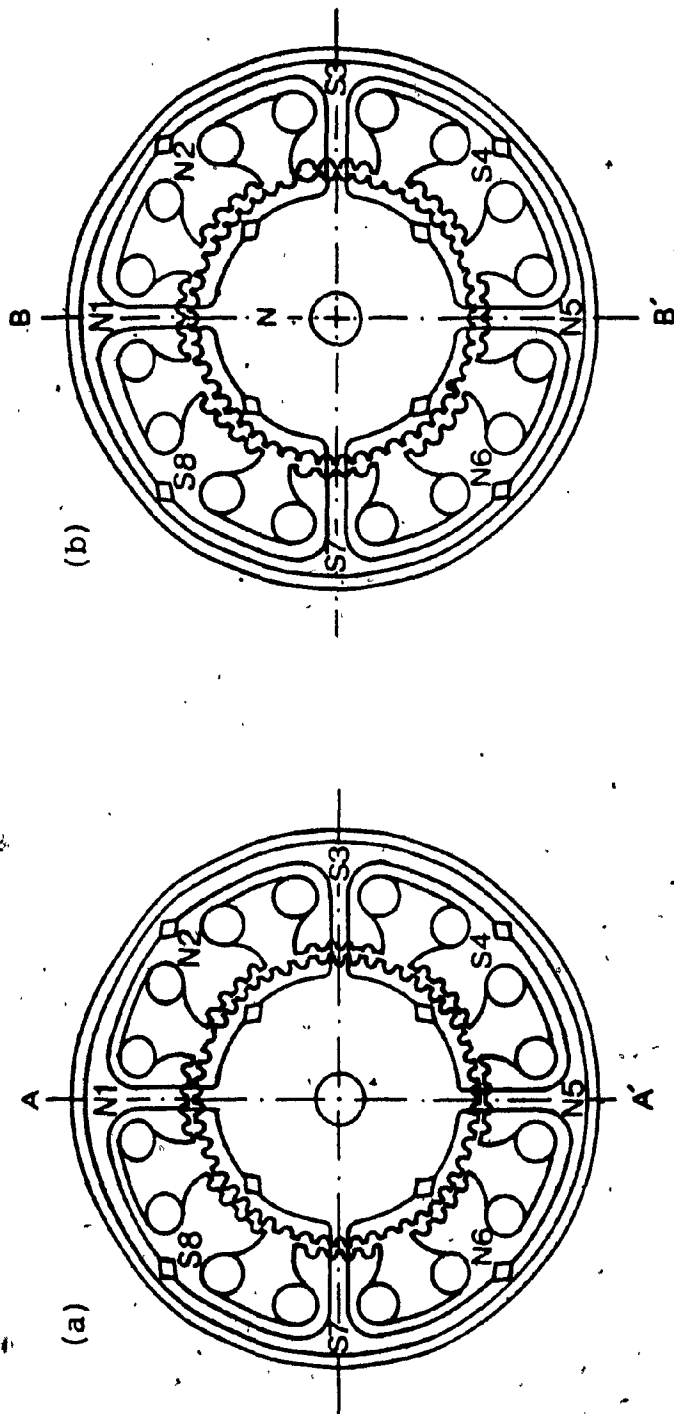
Section View of a D-C.P-M Stepping Motor.
